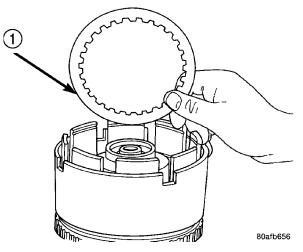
Install Last UD Clutch Disc 1 - ONE UNDERDRIVE CLUTCH DISC
